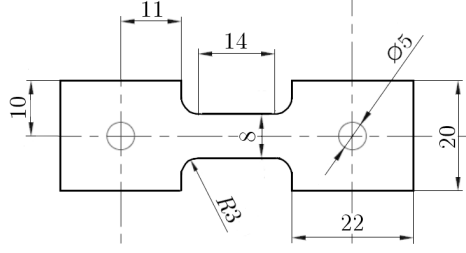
Geometry and dimensions of the tensile specimens [mm] (Rusinek *et al.*, 2008)
